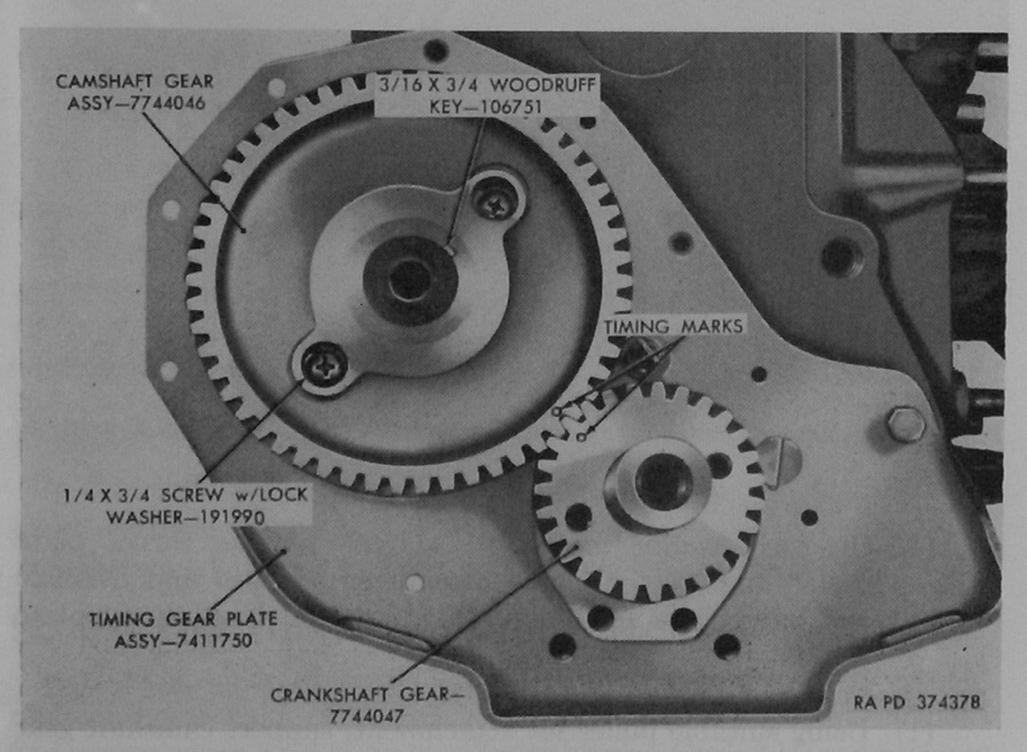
Timing gears with cover removed (early engine assembly 7411559 shown).
